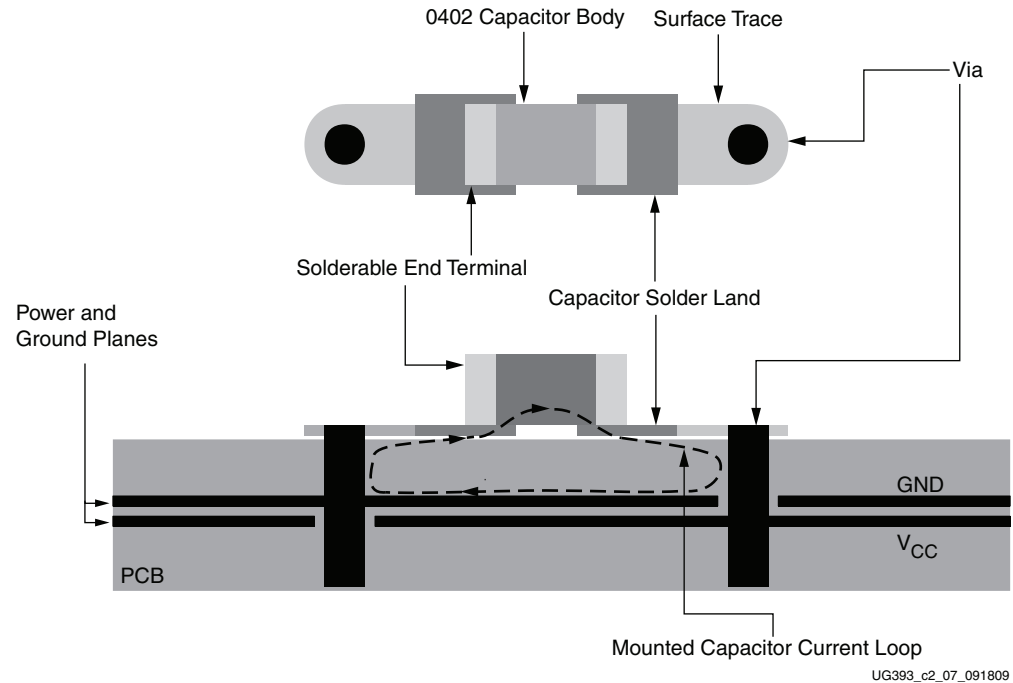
Example Cutaway View of PCB with Capacitor Mounting
